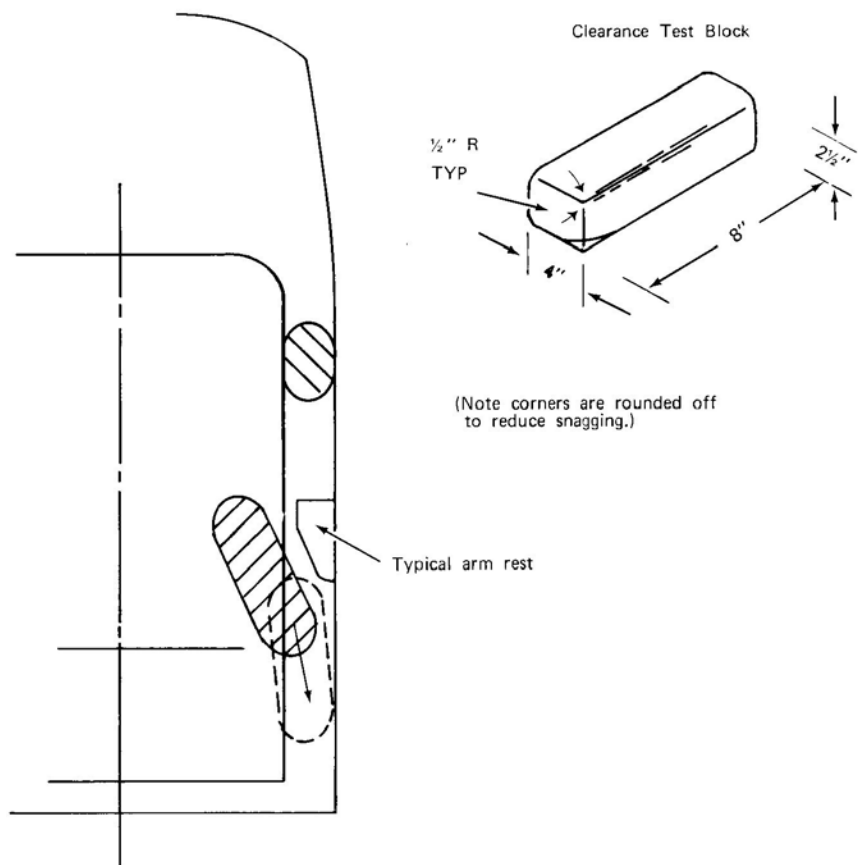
USE OF CLEARANCE TEST BLOCK TO DETERMINE HAND/ARM ACCESS
